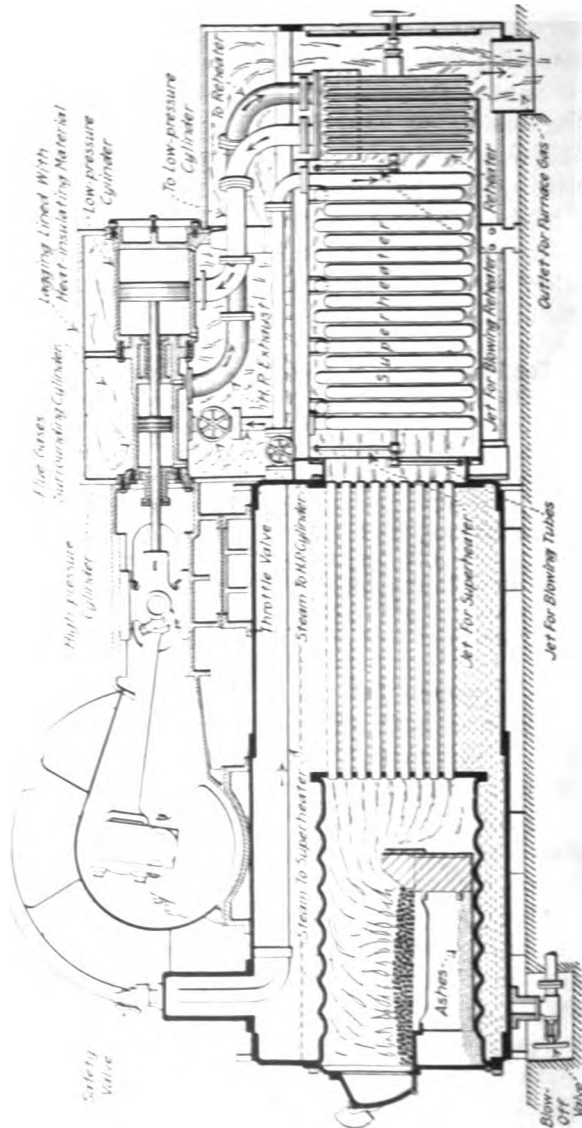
Longitudinal section through cylinders and boiler of a Buckeye-mobile. (Buckeye Engine Co.)
